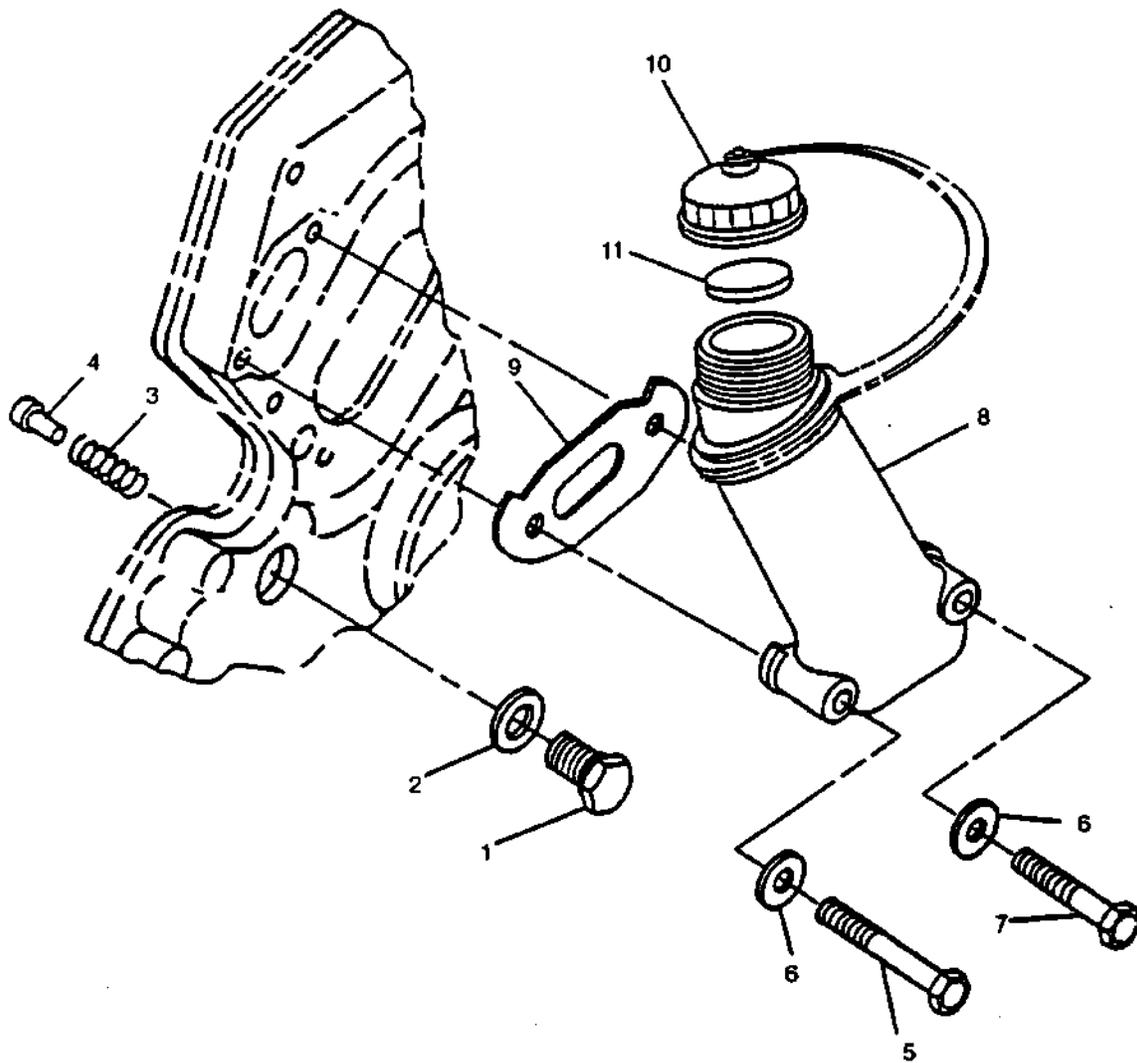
Oil Pressure Regulating Valve and Oil Filler Assembly
